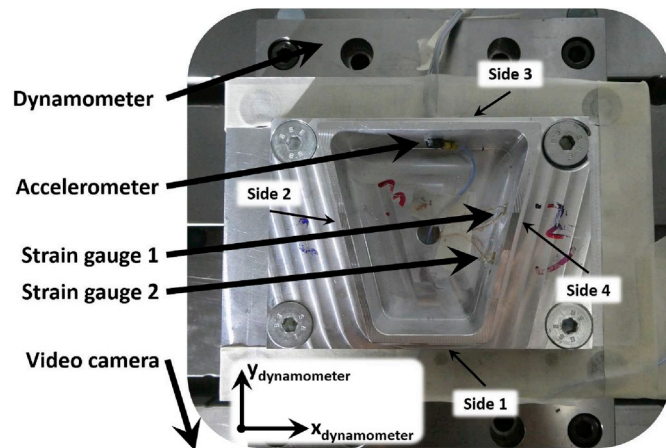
Picture of experimental setup in cnc machine. The video camera is placed outside the picture.
